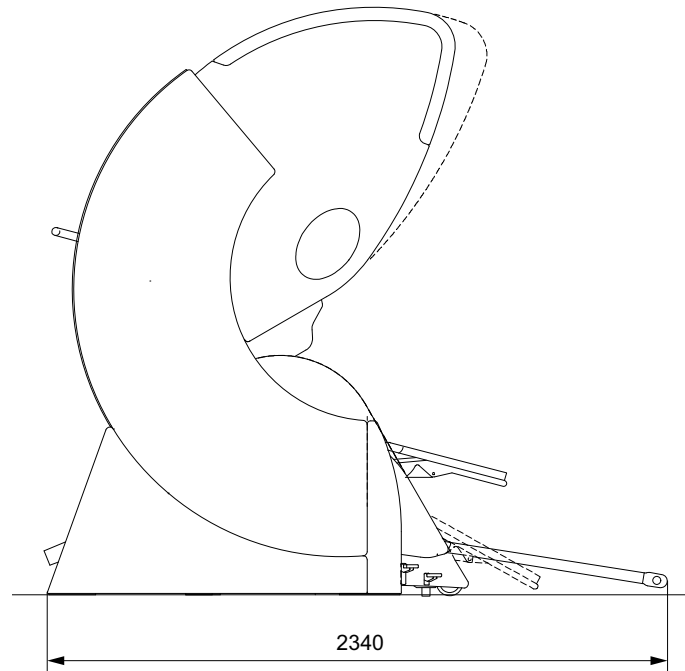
The probe unit in seated position with a chair. Dimensions in millimeters.
